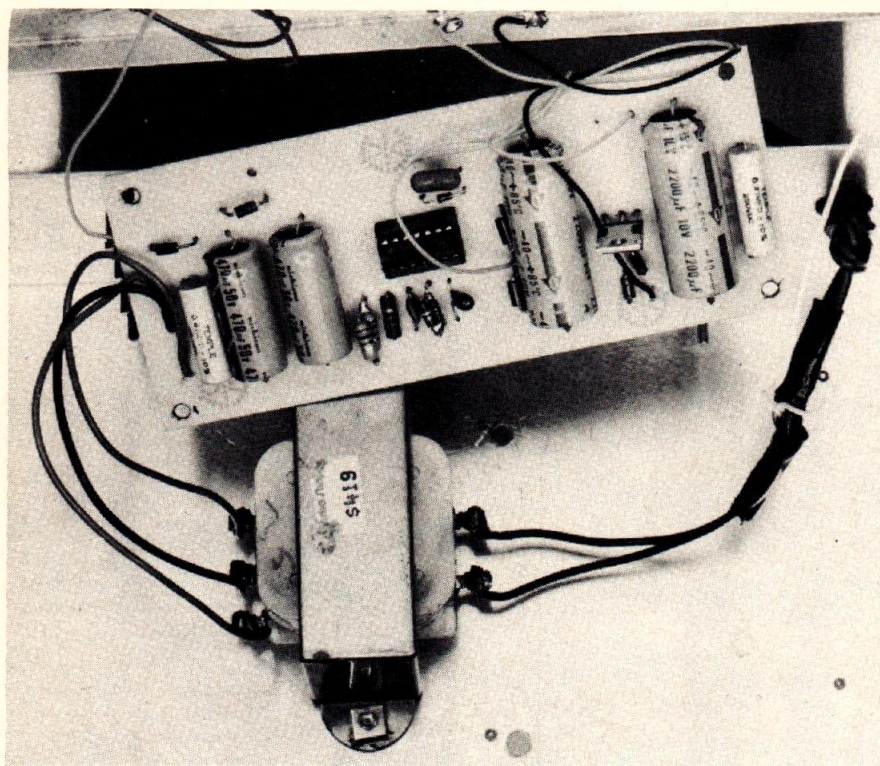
TRANSFORMER IS MOUNTED on chassis-box bottom; power-supply board on standoffs at enclosure's rear.
